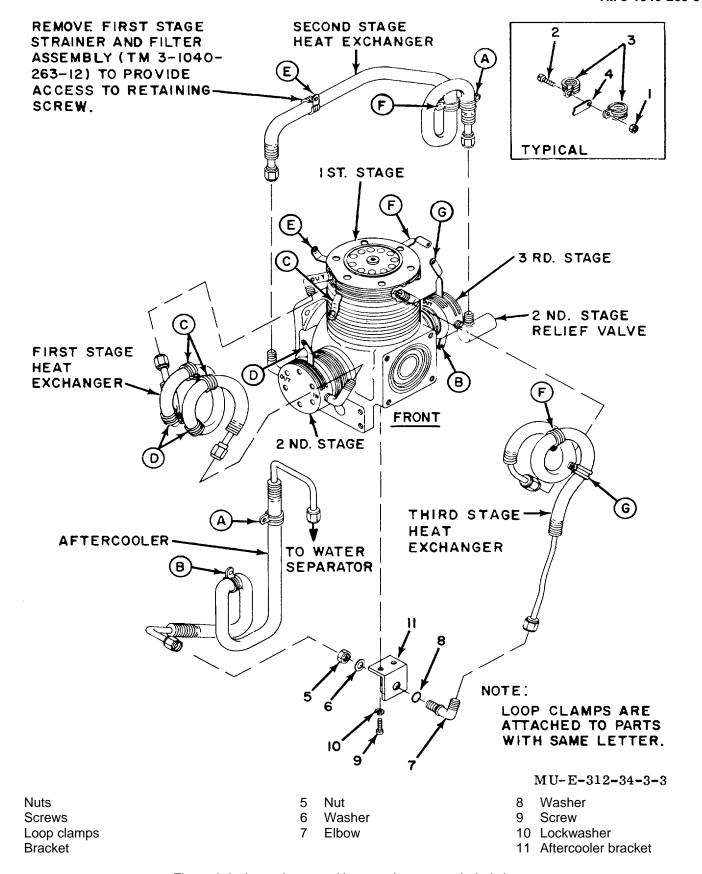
Loop clamp and heat exchanger-exploded view.
